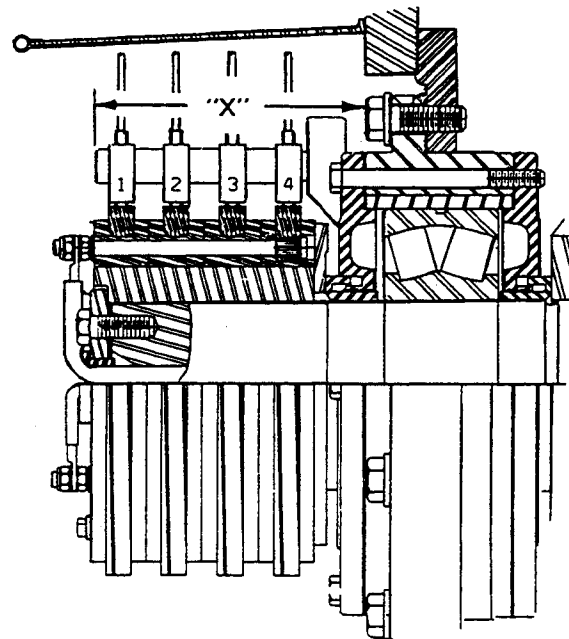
Large Bearing "X" (Protrusion) Measurement
